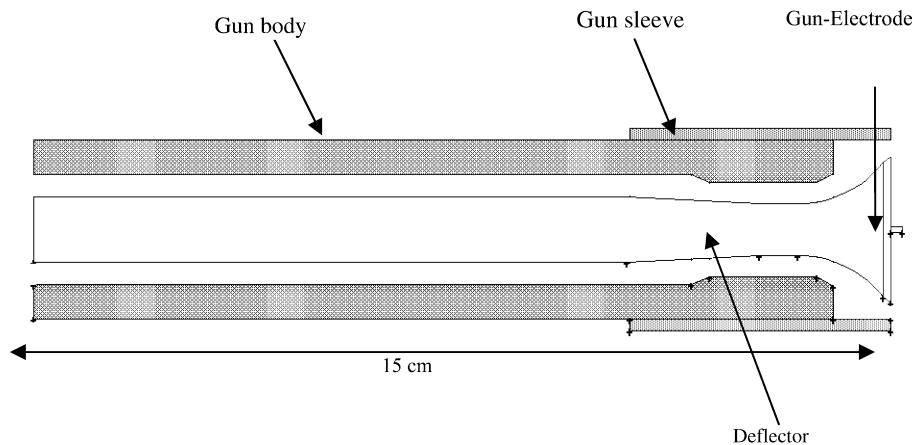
Cross-sectional view of Nordson corona spray gun.
